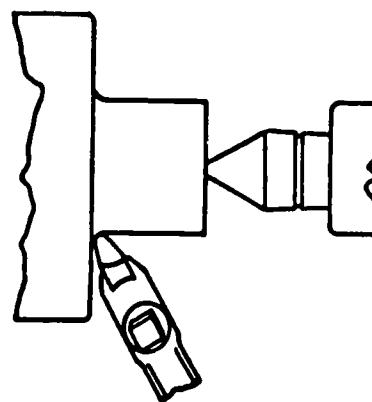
shows the method of facing a cylindrical piece. A right-hand side tool is used
